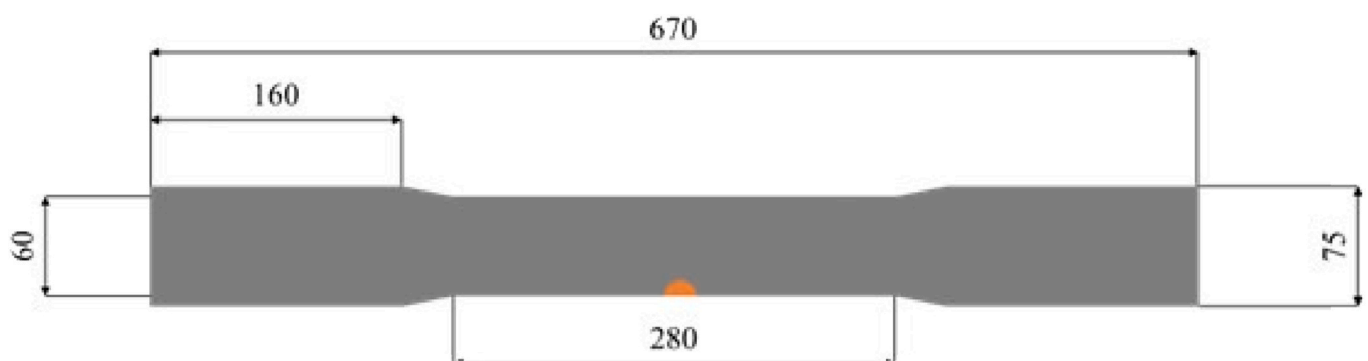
Schematic representation of the dog-bone steel specimen (dimensions in mm). The thickness of the specimen is 8 mm.
